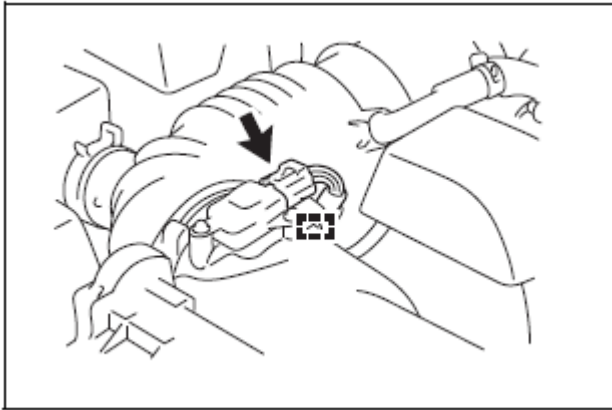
Identifying Intake Air Flow Meter Sub-Assembly Connector
